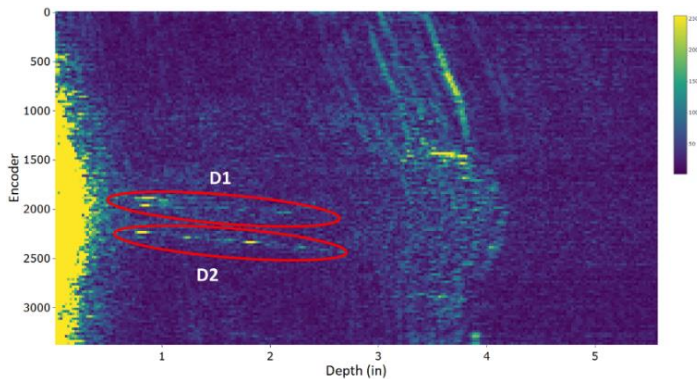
Heat map in -45° direction from the gage side MPA showing two transverse defects in the weld
